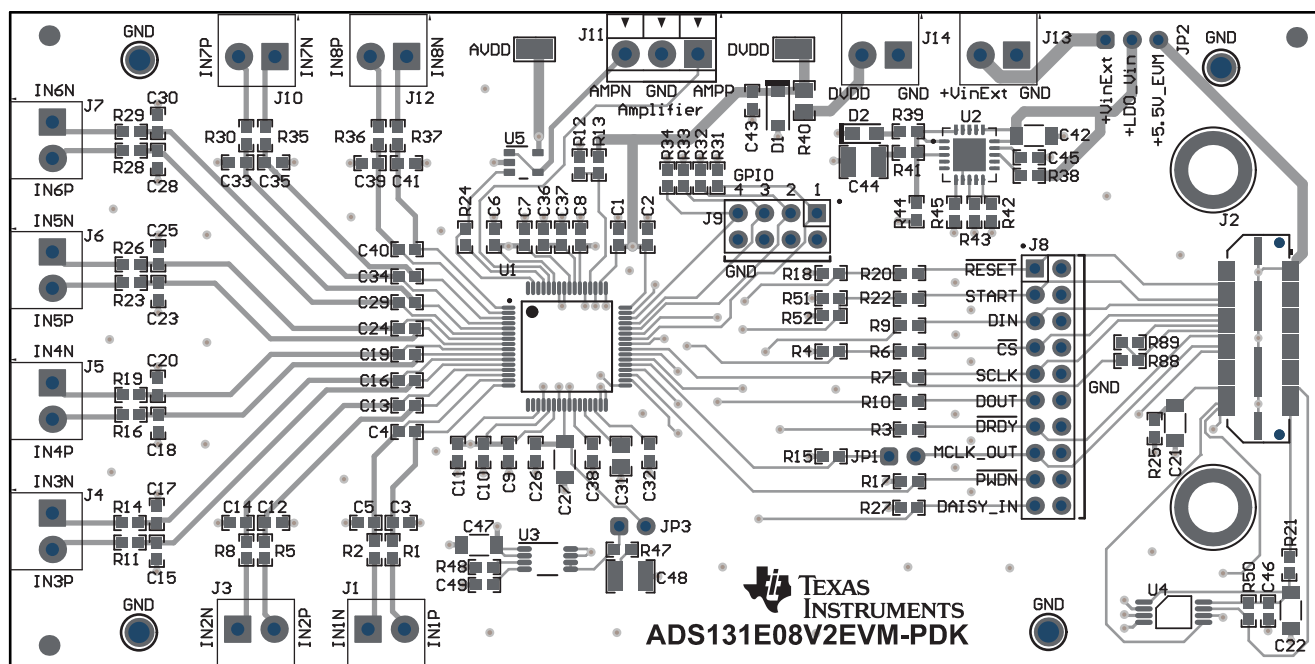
PCB Layout for the ADS131E08EVM (Top View)
